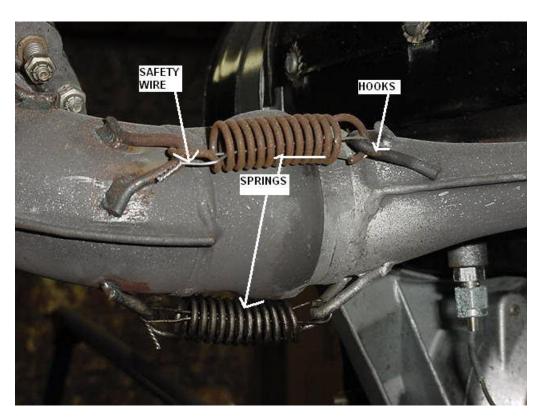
Exhaust Installation (Front of Elbow and Manifold)
